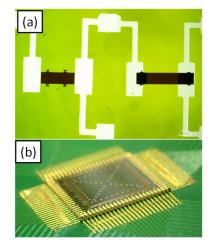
(a) Adhesive-type interconnection. The wires were fabricated using SOS printing. (b) Printed wire bonding for interconnection of Si chips.
